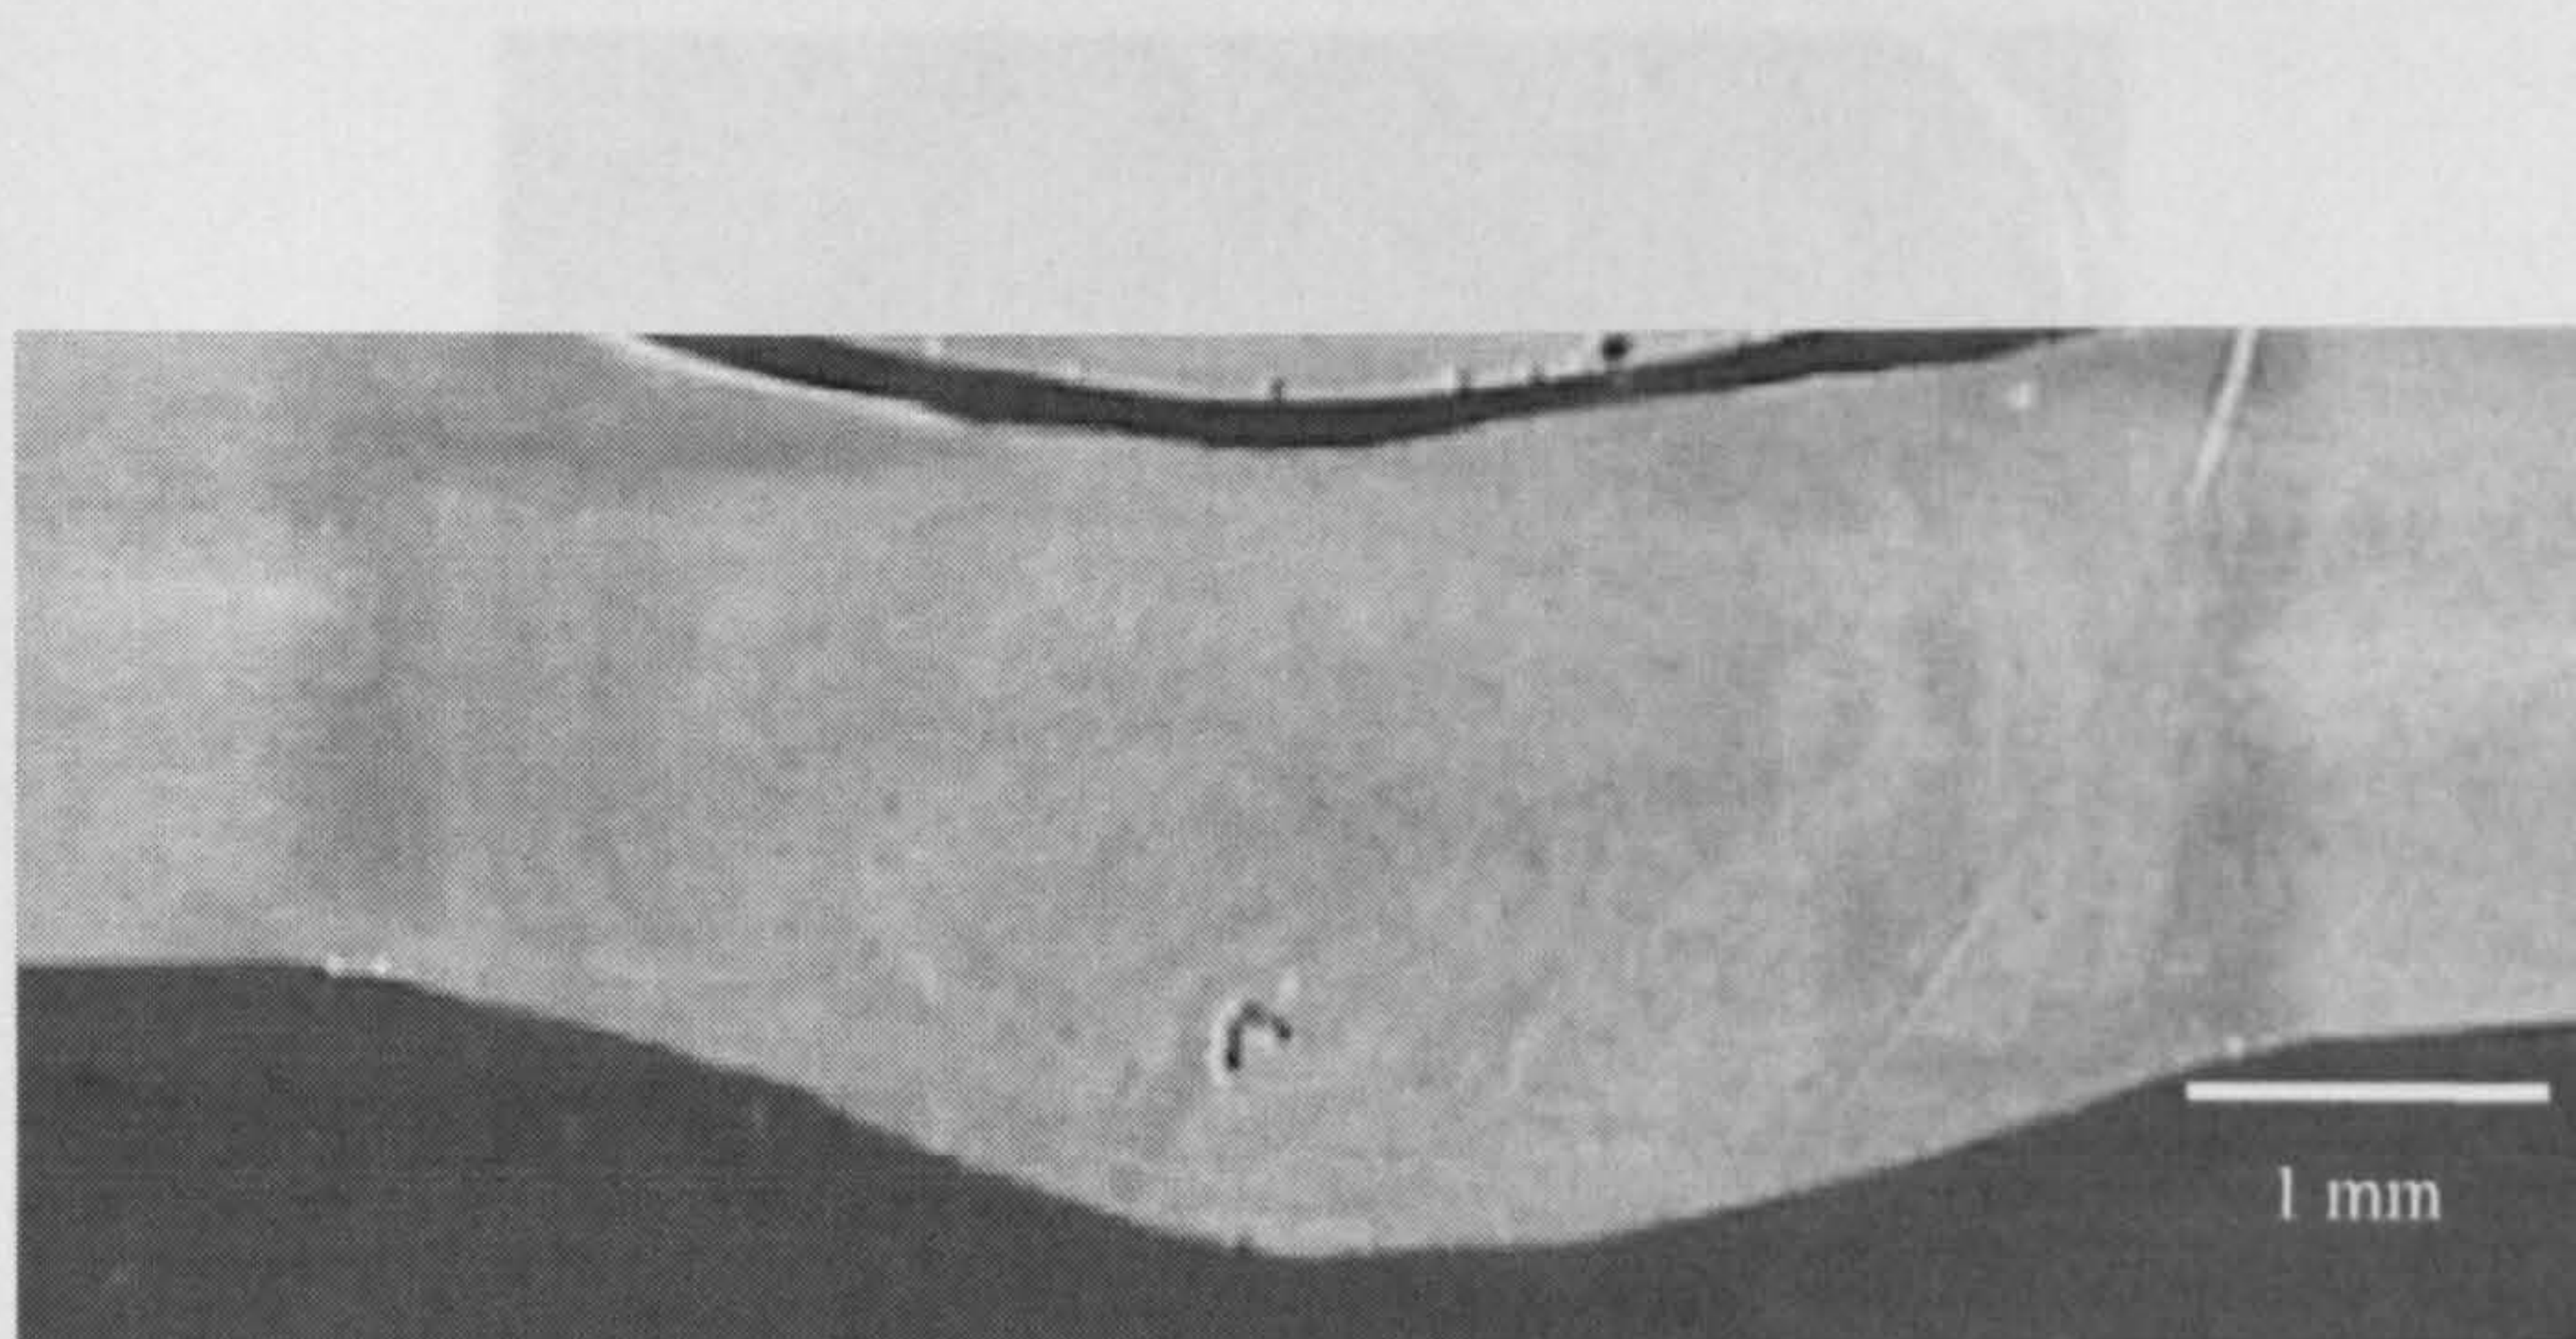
Micrograph of 2mm AA5083 conduction butt-weld; weld speed = 450 mm/min
